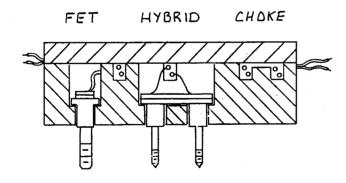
Components can be mounted on heat sinks within a matrix transformer. The heat sink stud can double as a mounting stud for the transformer.
